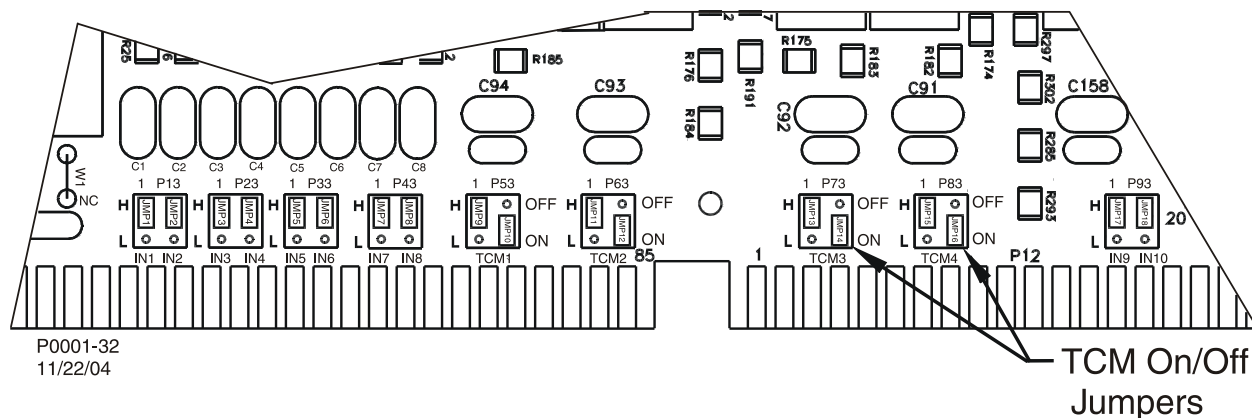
Contact-Sensing and TCM Jumper Locations
